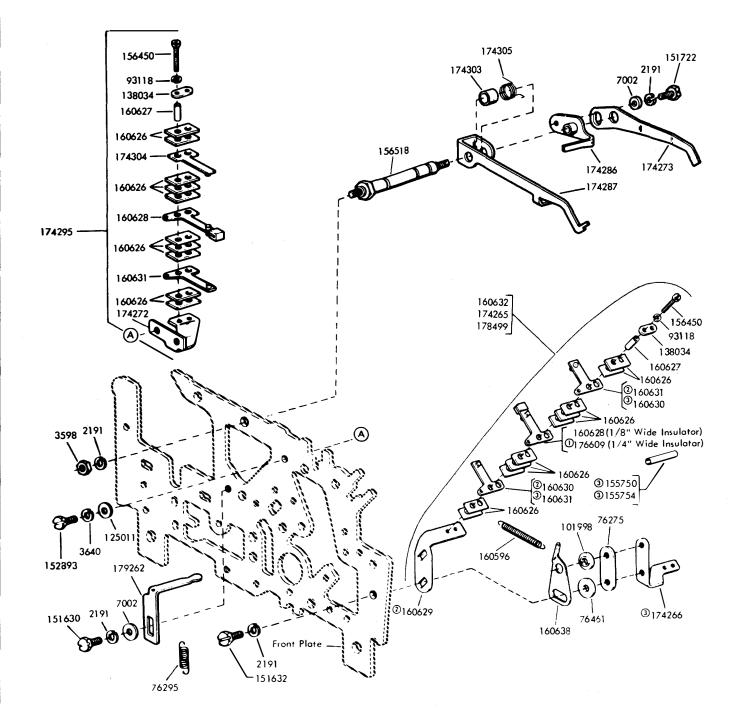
Front Plate Mechanism (Sheet 1 of 3)
